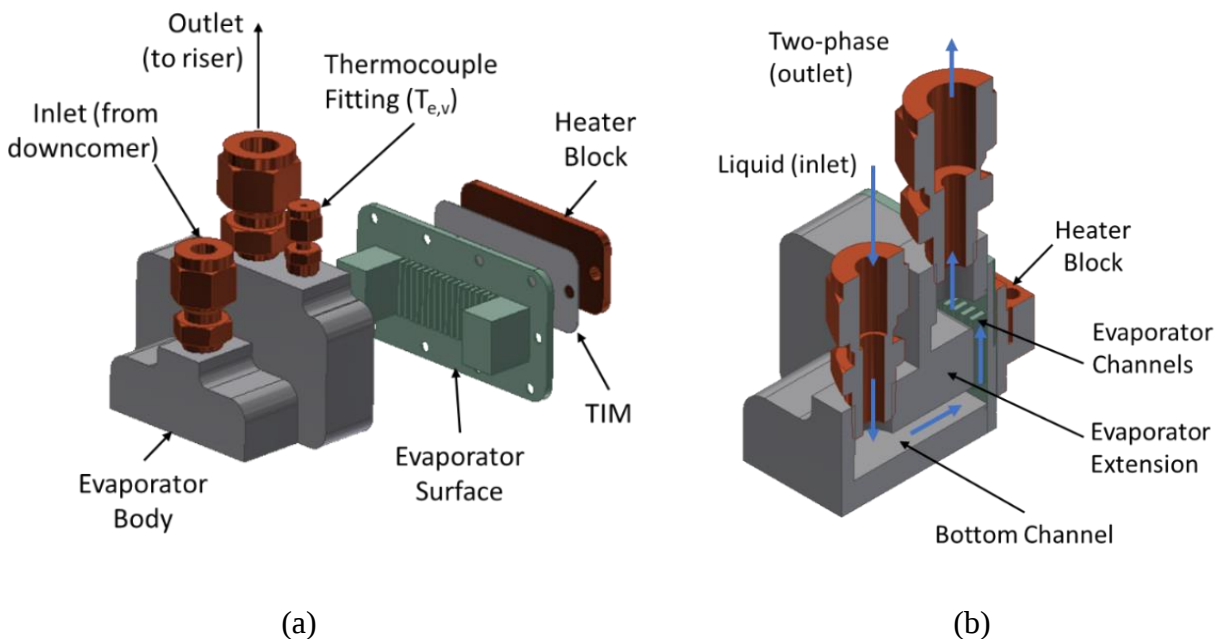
(a) Exploded view of the evaporator, (b) cross-section view of evaporator highlighting flow path.
